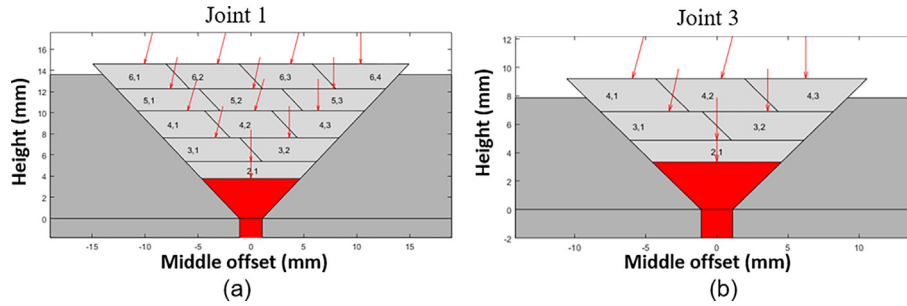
Generated welding schedule for Joints 1 and 3 produced from the minimum value of the assigned cost function $C(80\%,5\%,15\%)$ – the red arrows represents the pose of the welding torch per welding pass [45]. (For interpretation of the references to colour in this figure legend, the reader is referred to the web version of this article.)
